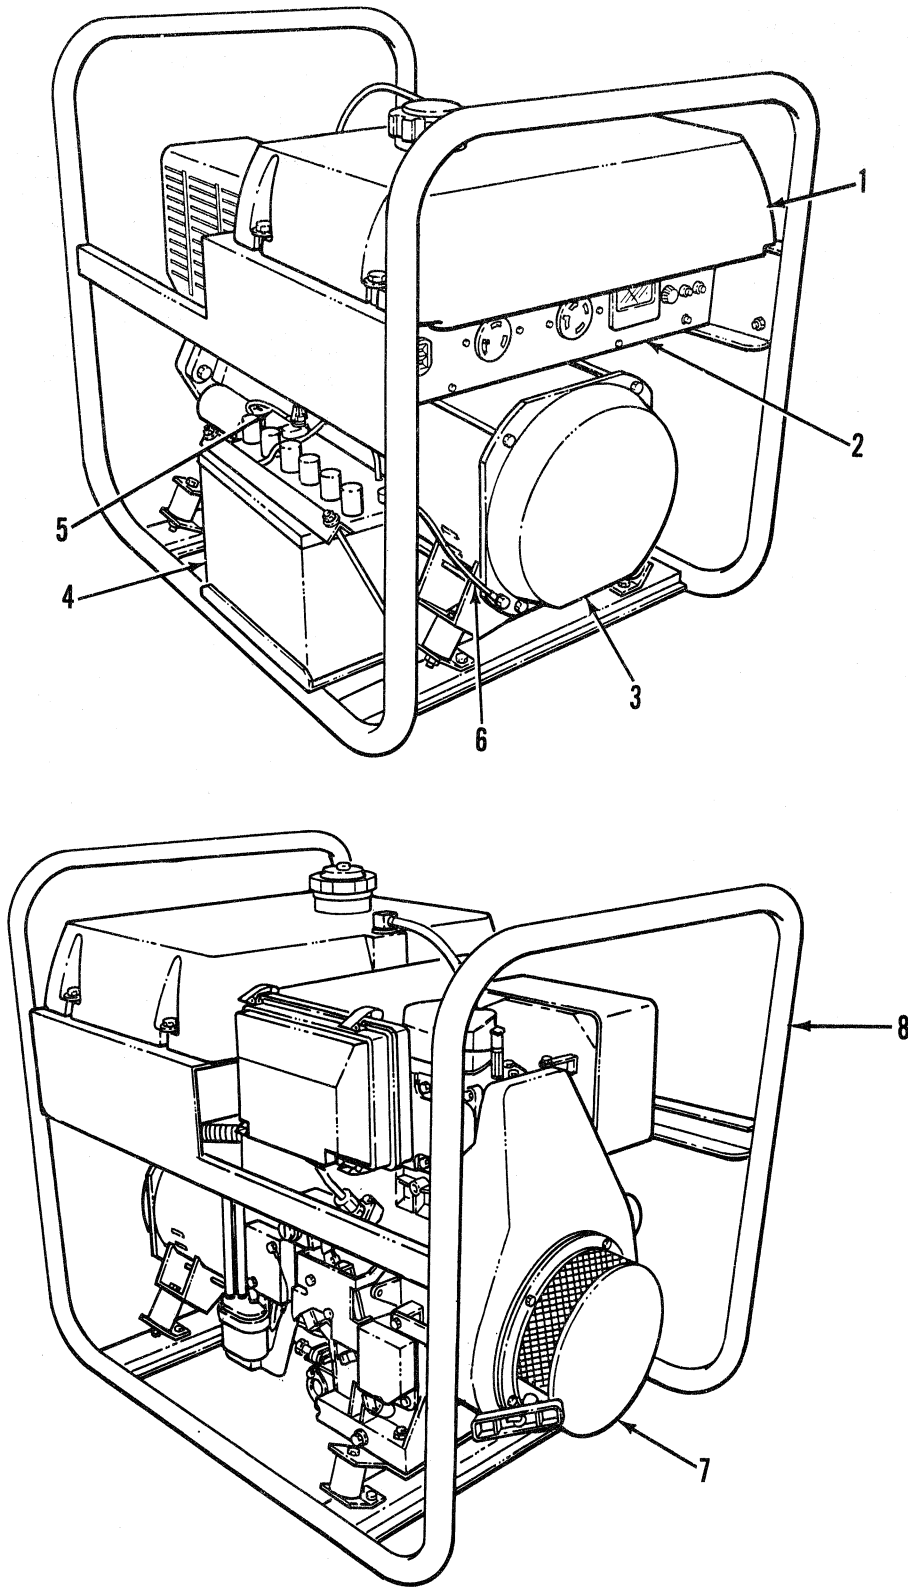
3KW Diesel Engine Driven Generator Set
